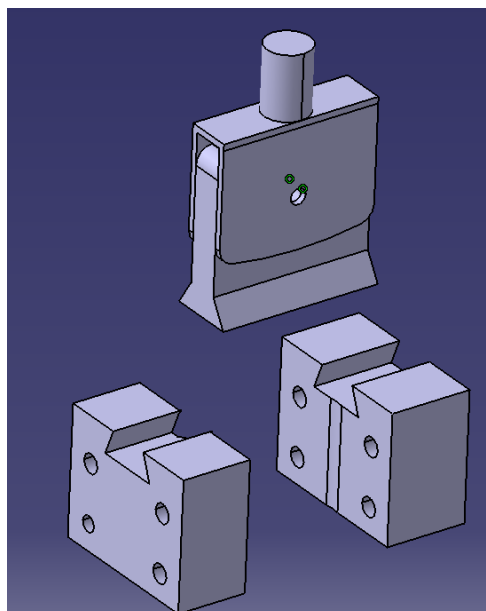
Dovetail Shaped Groove Design in Base Clamp Structure
